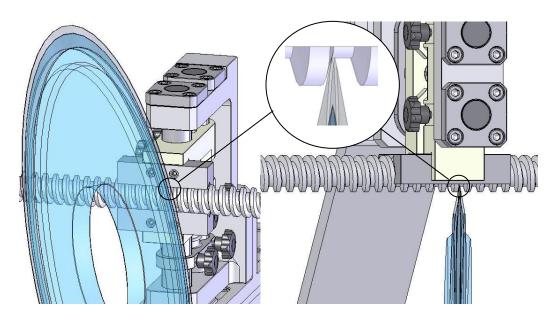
Thread grinding of a trapezoidal screw with a traveling rest for double sided support
